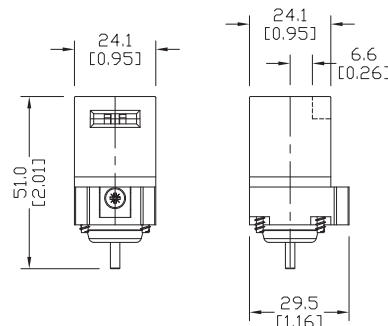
90° adjustable head with shaft hinge interlock - SP2K72, SDM2K72 models
